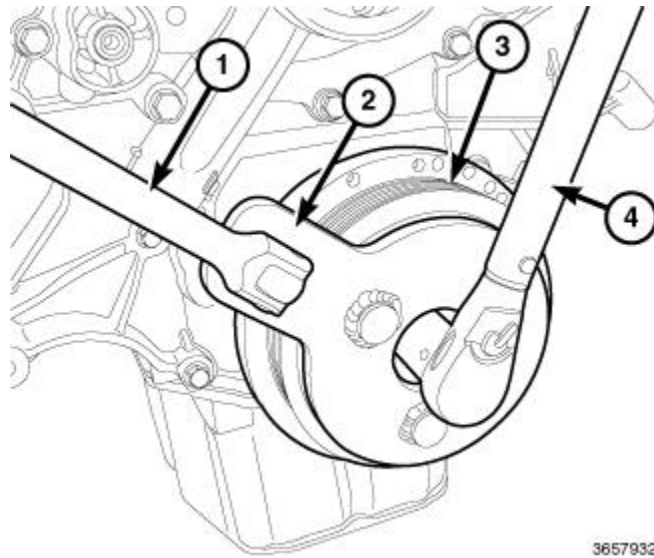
Installing Vibration Damper Onto Vibration Pulley
